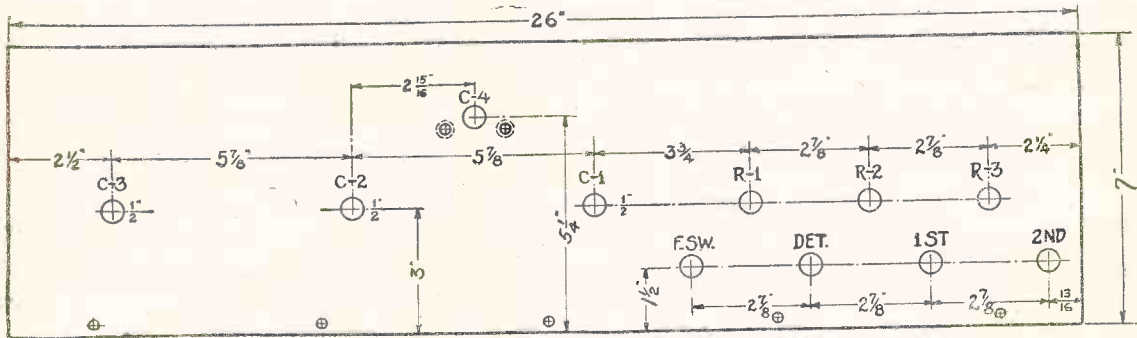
Drilling Plan, Showing Centers of All Units Mounted on Panel
